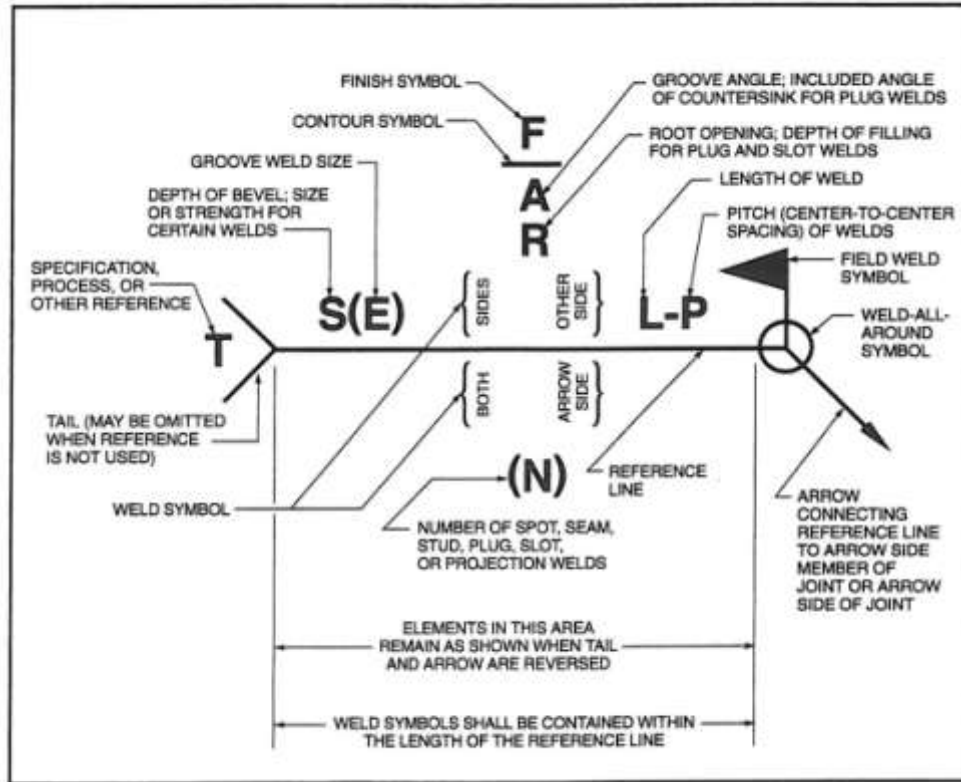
Standard Location of Elements of a Welding Symbol
